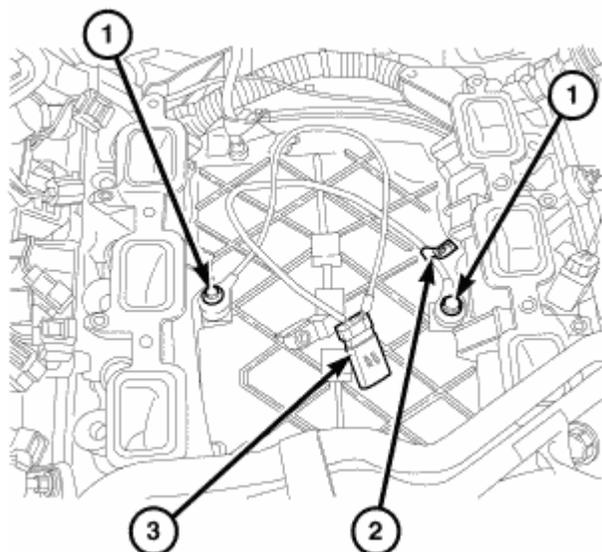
Identifying Sensor, Sensor Mounting Bolt & Engine
